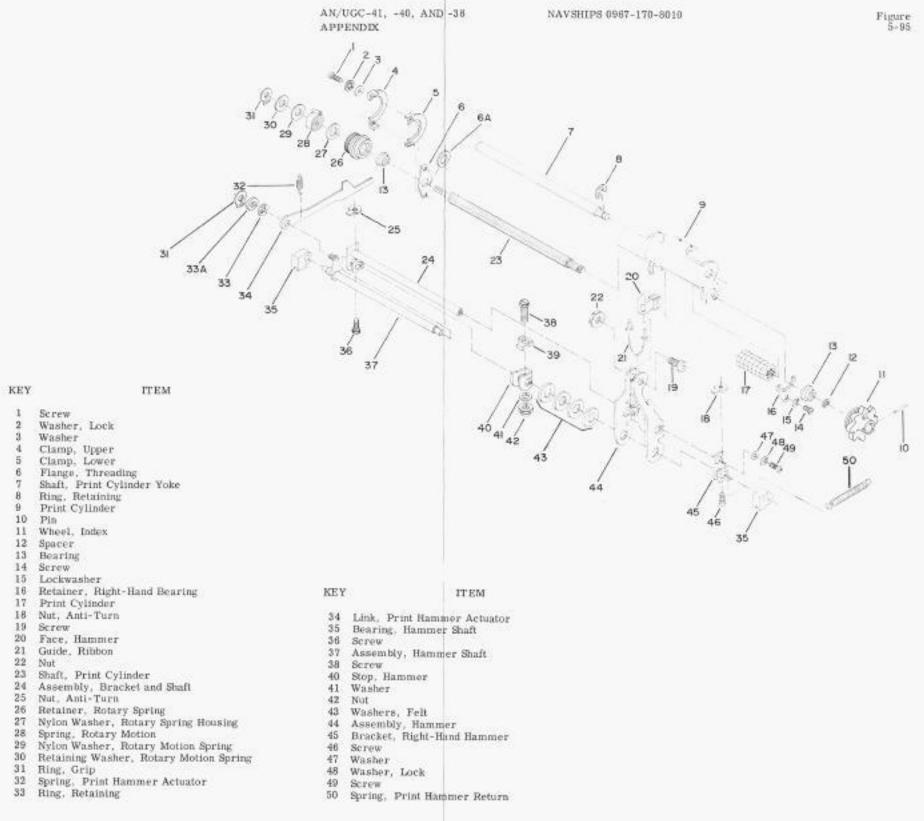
Print Hammer, Print Cylinder, and Print Cylinder Yoke Assembly
